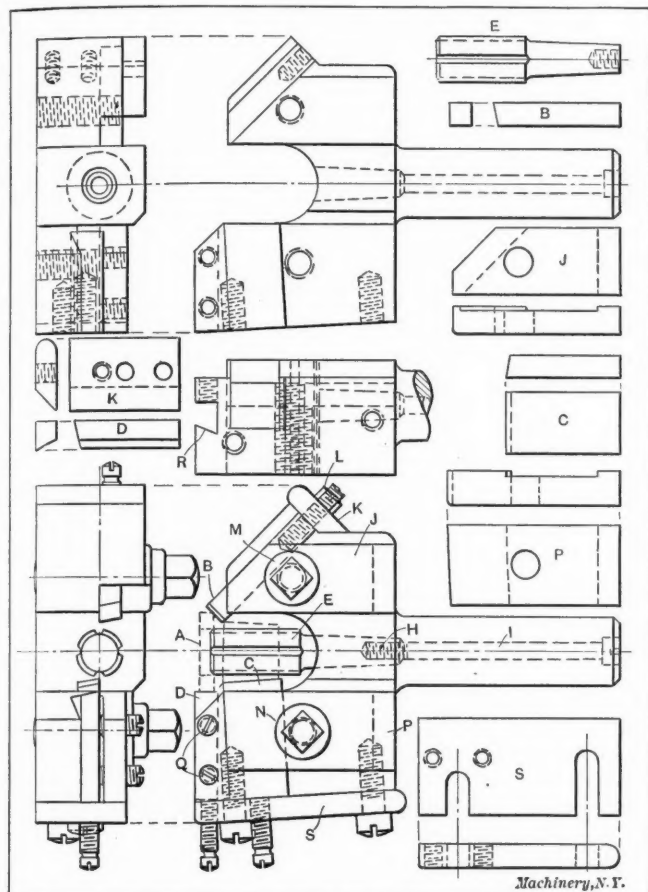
Tool for Finishing the Bushing of a Double Taper Cone Bearing
